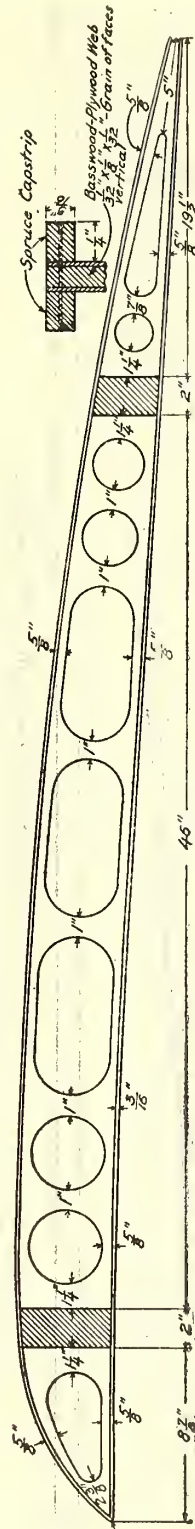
Circular opening type wing rib for HS-1L machine.
